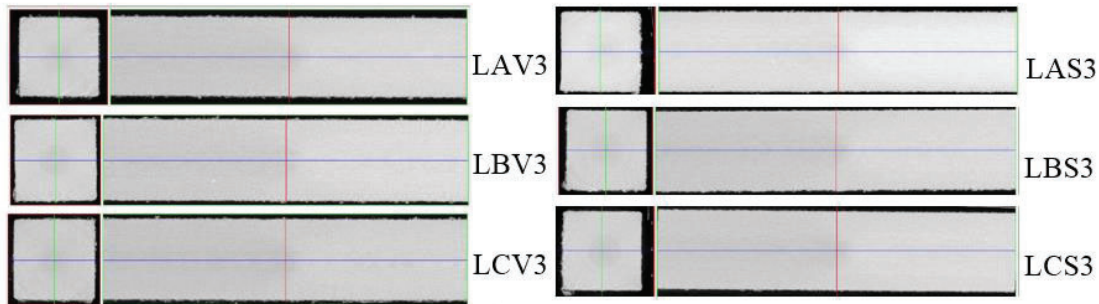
Transverse and Coronal views of low-level energy density vertical-build specimens (left) and slant-build specimens (right) at different build locations
